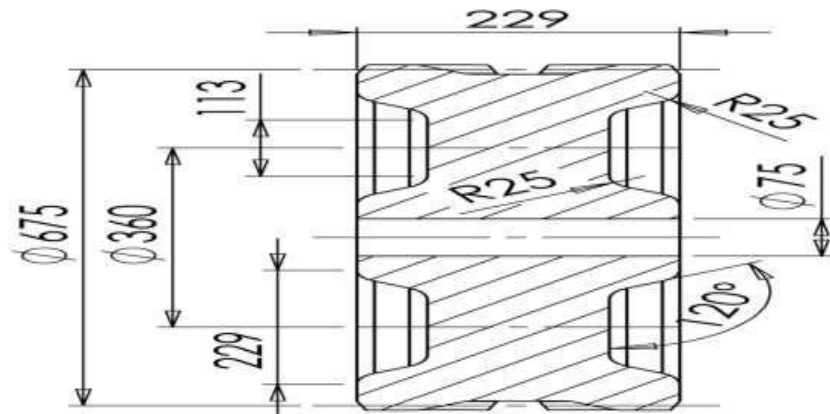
Cut-Section of Gear with Groove and Taper Edges Module 12 Dia 675
